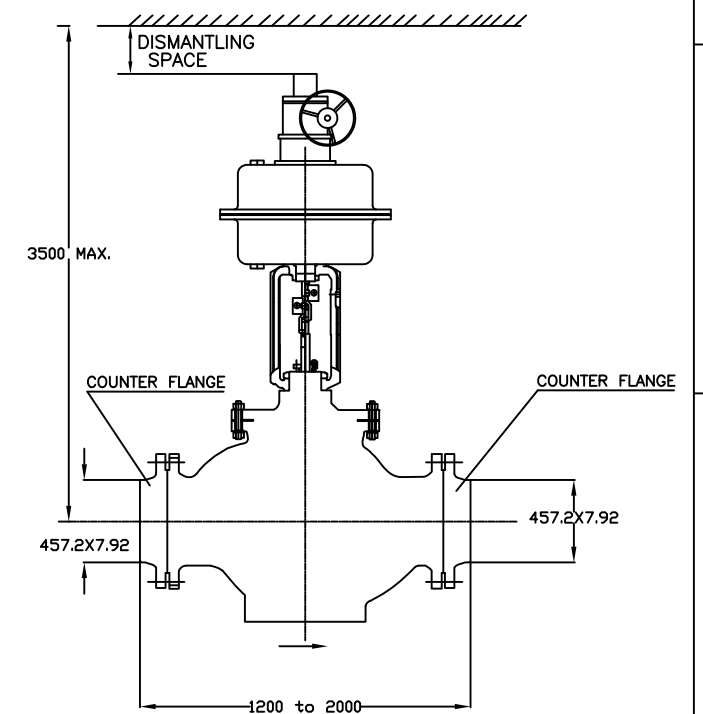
PROPOSED ARRANGEMENT OF LEAKAGE STEAM CONTROL VALVE (REFER SH.2, T.R. 1.3)
